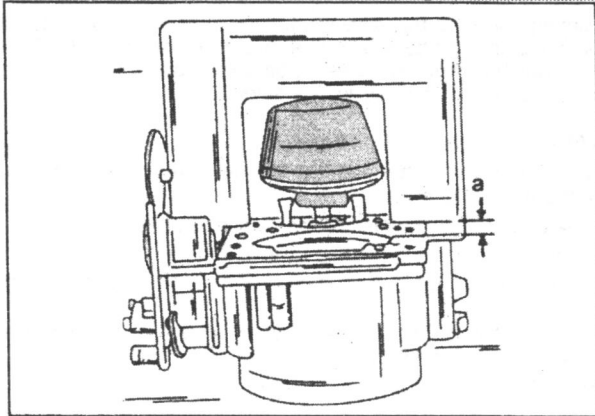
Checking the float level of a Solex PBISA carburettor. The gap "a" must not exceed 1.0 mm.
